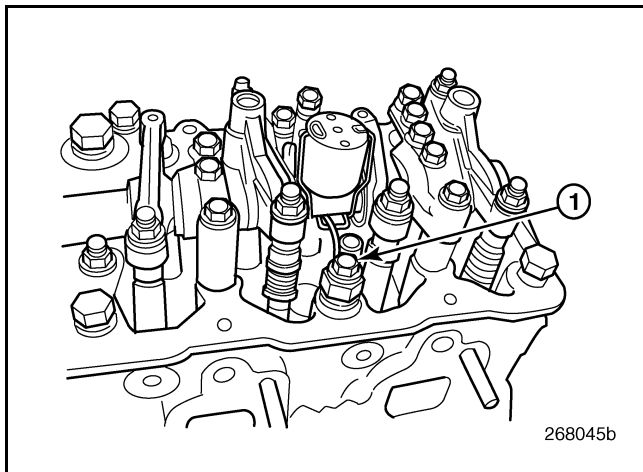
Engine Brake Solenoid Ground Wire Secured to Cylinder Head Bolt
